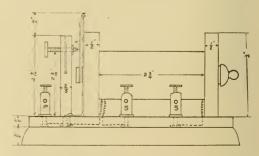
SIDE VIEW OF "SHOCKING" COIL
